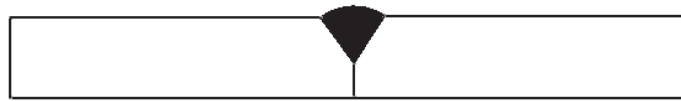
The drawing view, after adding the welding symbol
